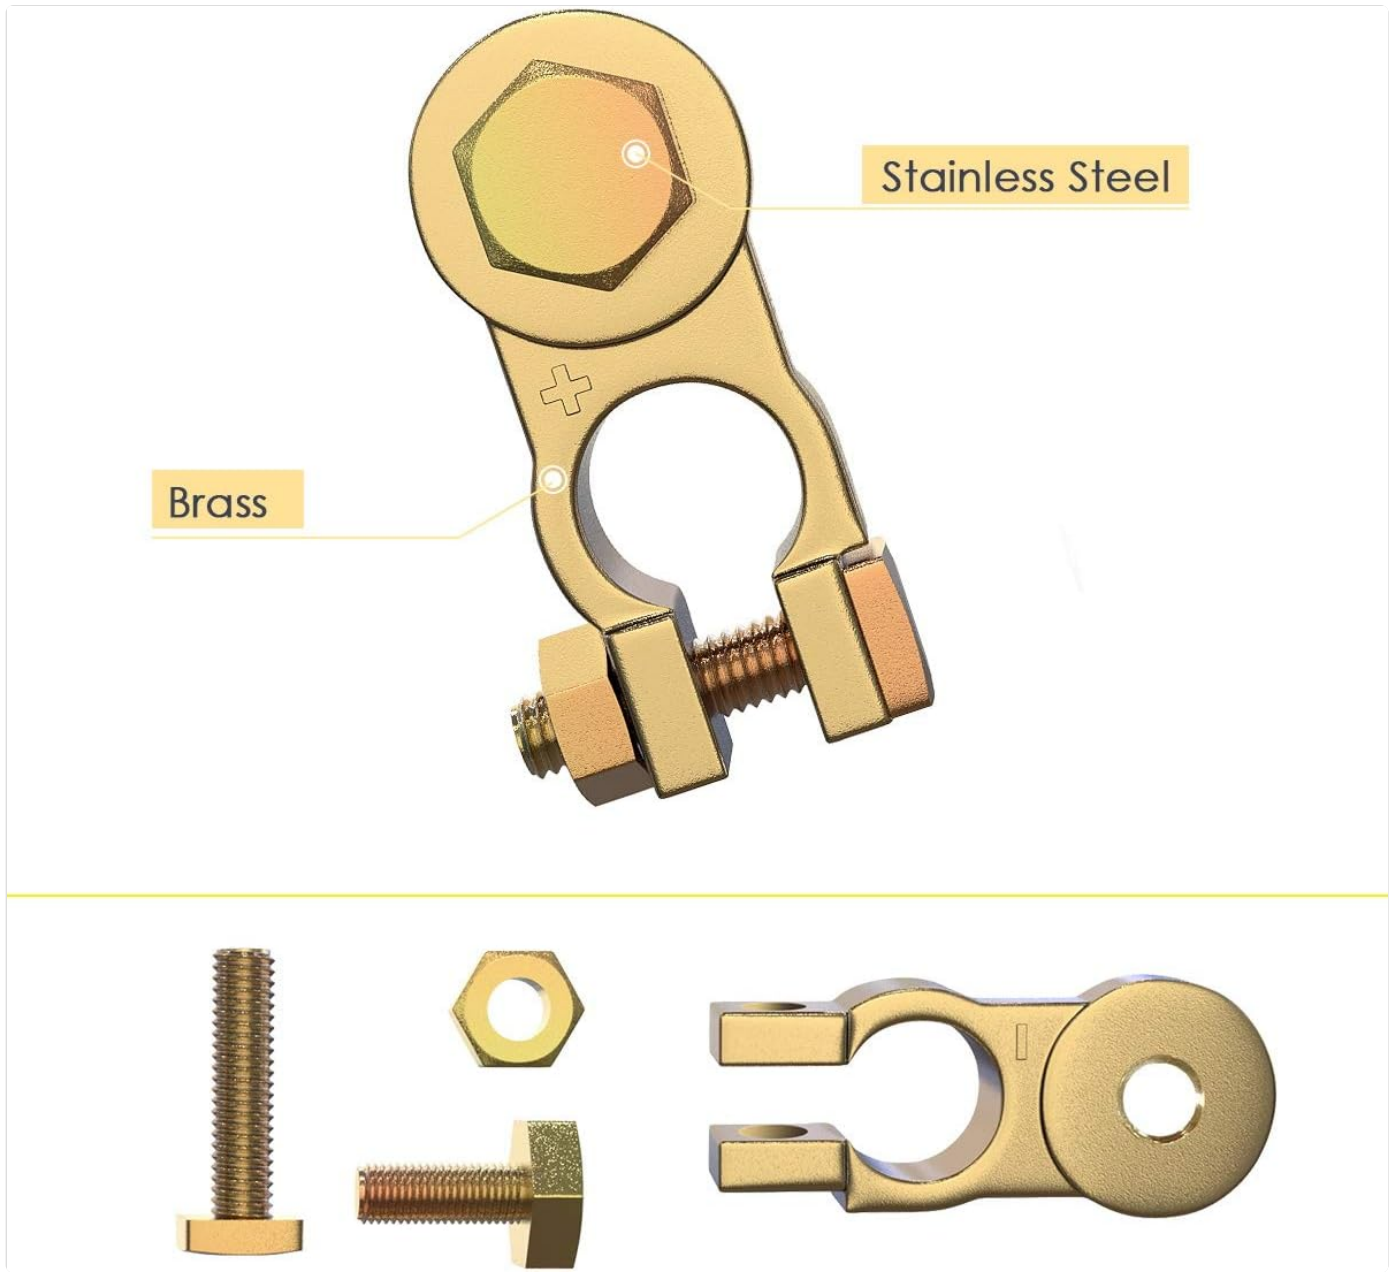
Exploded view showing the brass body and stainless steel bolt components of the terminal connector.
